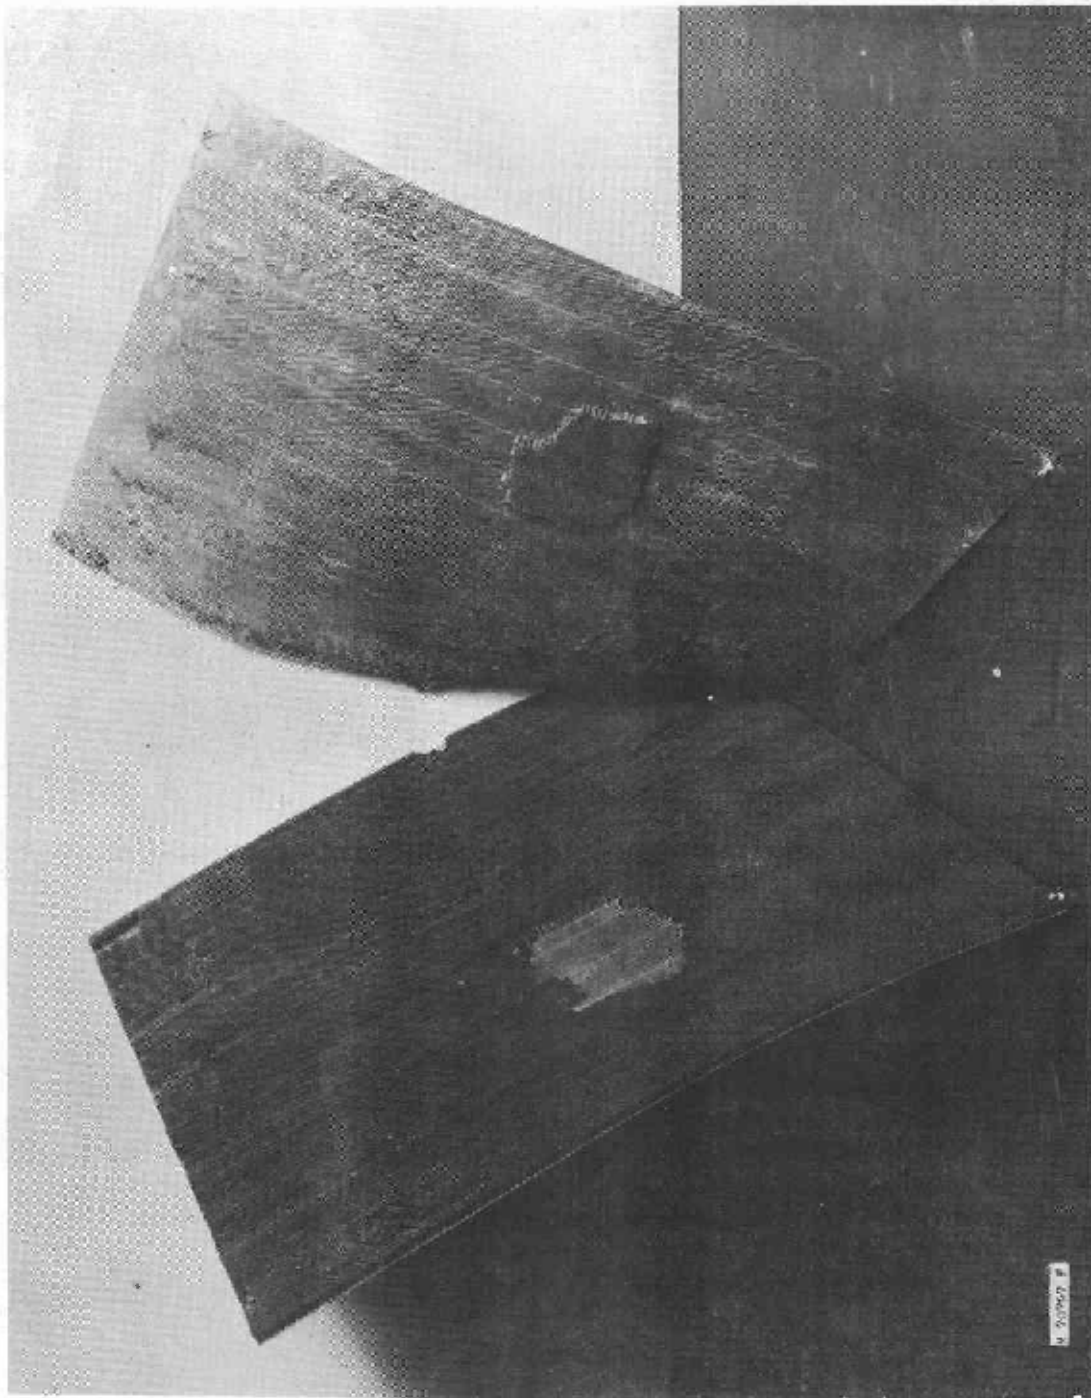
Exploded sandwich panel of aluminum-to-paper honeycomb caused by internal-pressure test.
